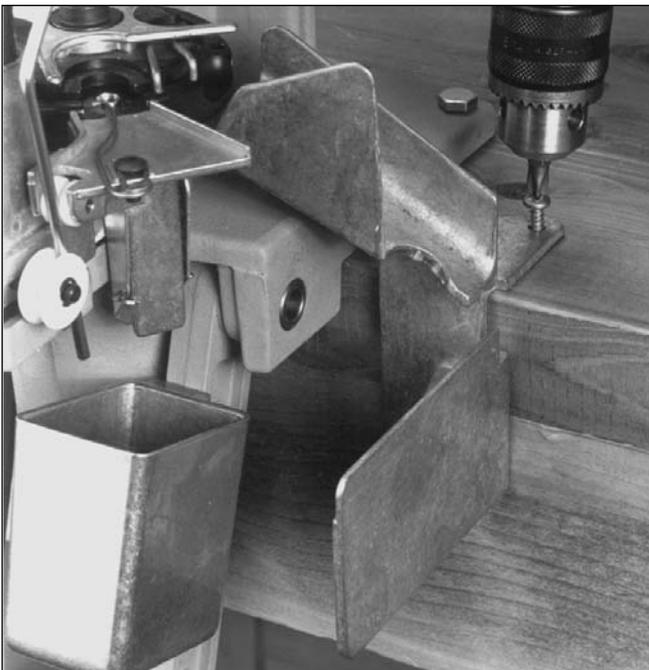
This photograph shows the correct mounting position of the cartridge collection bin bracket in relation to the machine.
